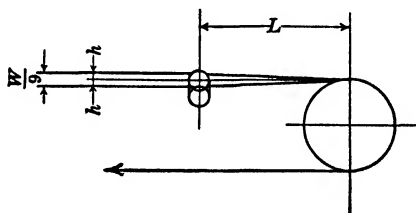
Troughed Belt Flattening at Head Pulley.
